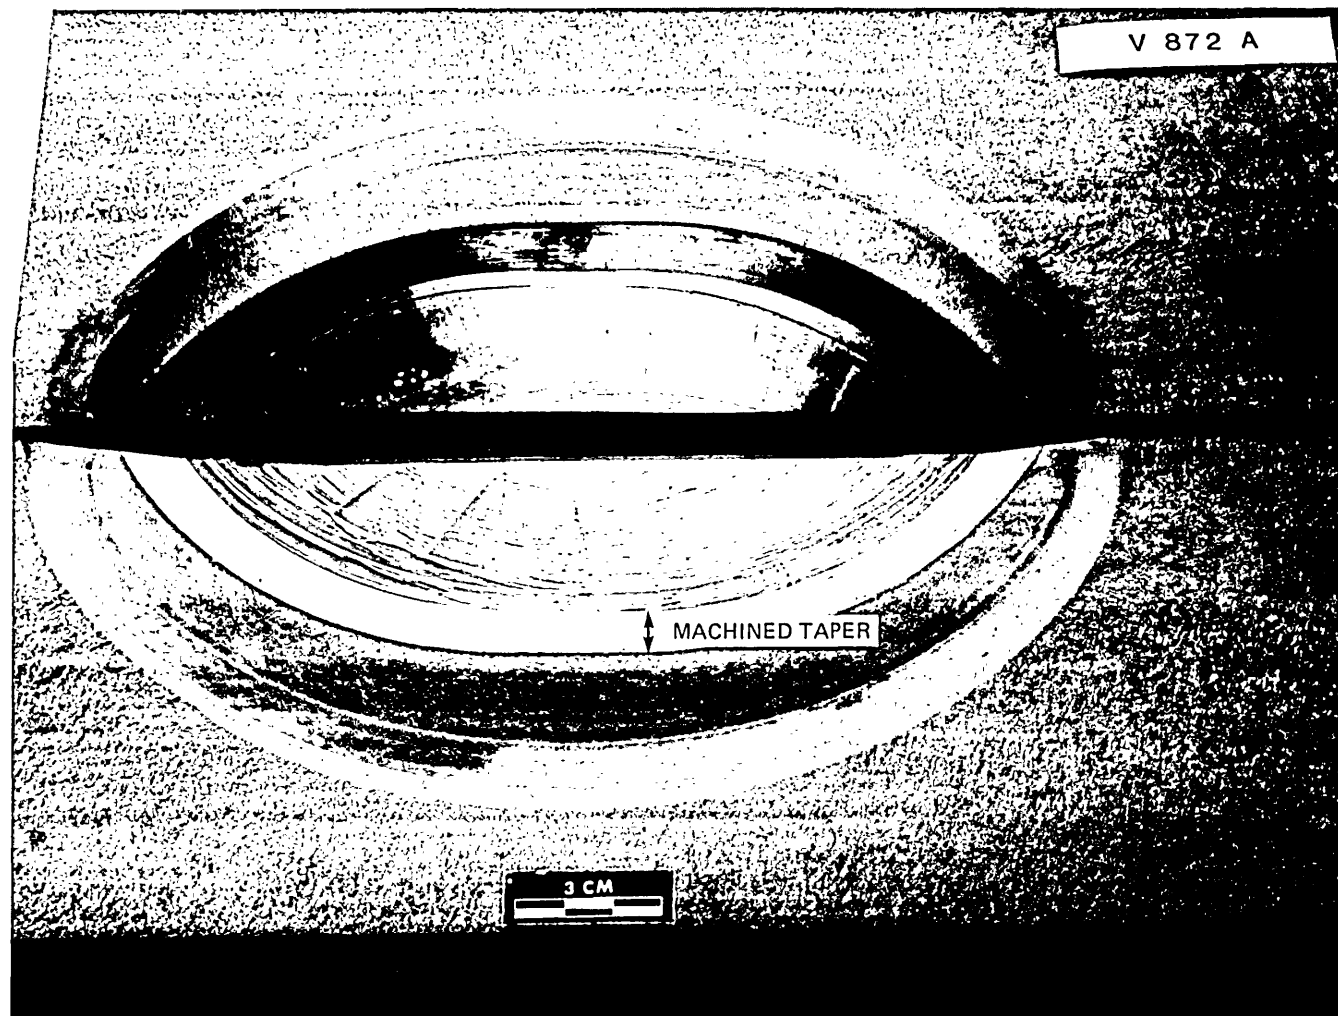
Halves of fatigue-grown flaw in weld V872.
